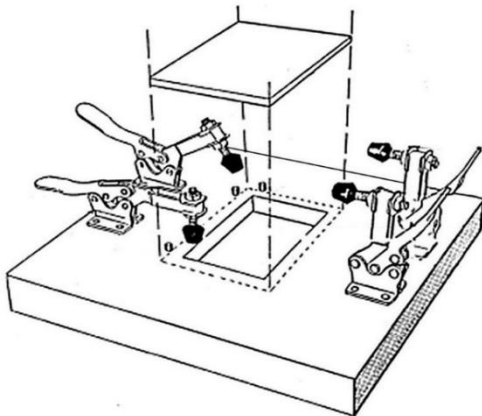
Steel fixture for low-velocity impact testing with the specimen, designed according to ASTM D7136 [23].
